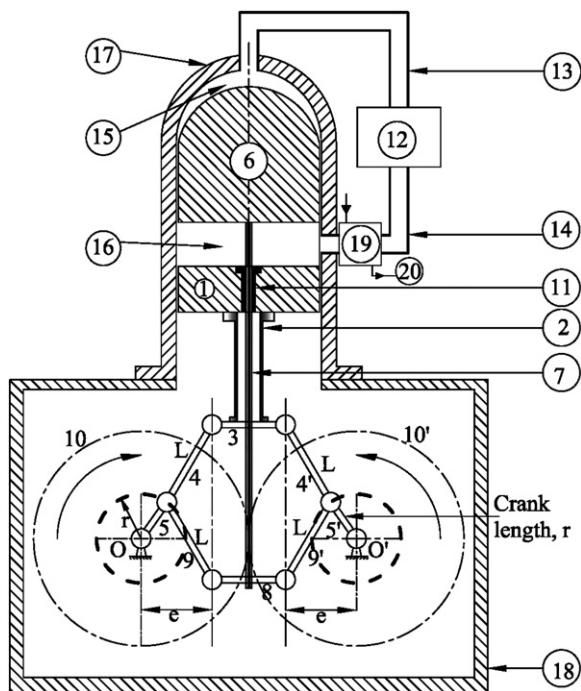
Schematic of Stirling engine with the rhombic drive mechanism. 1: Piston; 2: Piston rod; 3: Piston yoke; 4, 4': Connecting rod (for piston yoke); 5, 5': Crank; 6: Displacer; 7: Displacer rod; 8: Displacer yoke; 9, 9': Connecting rod (for displacer yoke); 10, 10': Spur Gears; 11: Bush; 12: Regenerator; 13: Multiple heater tubes; 14: Connecting duct; 15: Expansion space; 16: Compression space; 17: Cylinder head; 18: Crankcase; 19: Cooler; 20: Coolant.
